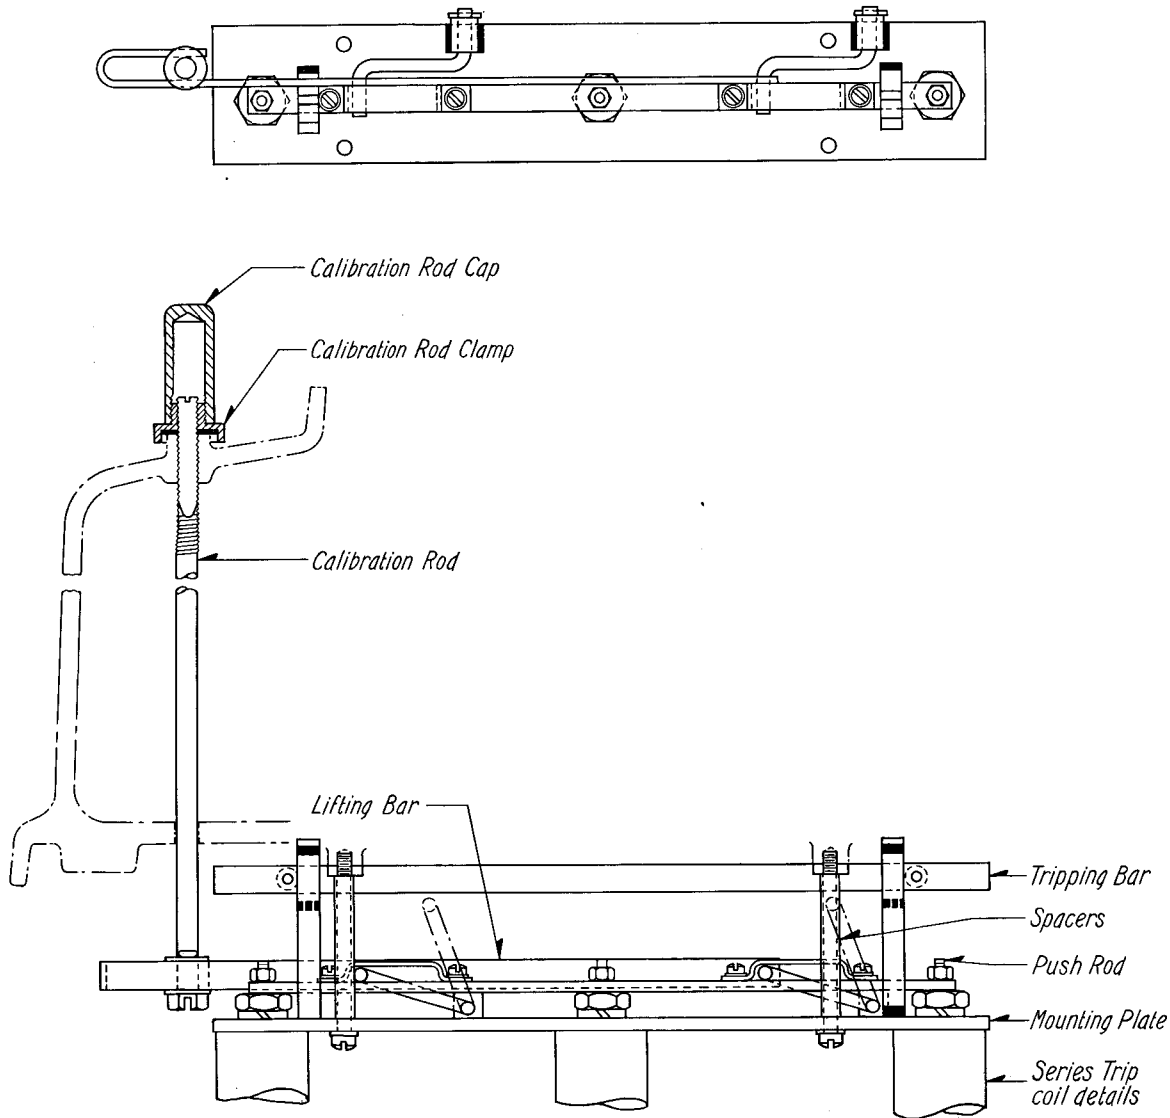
SERIES TRIP ATTACHMENT AND MOUNTING PLATE
